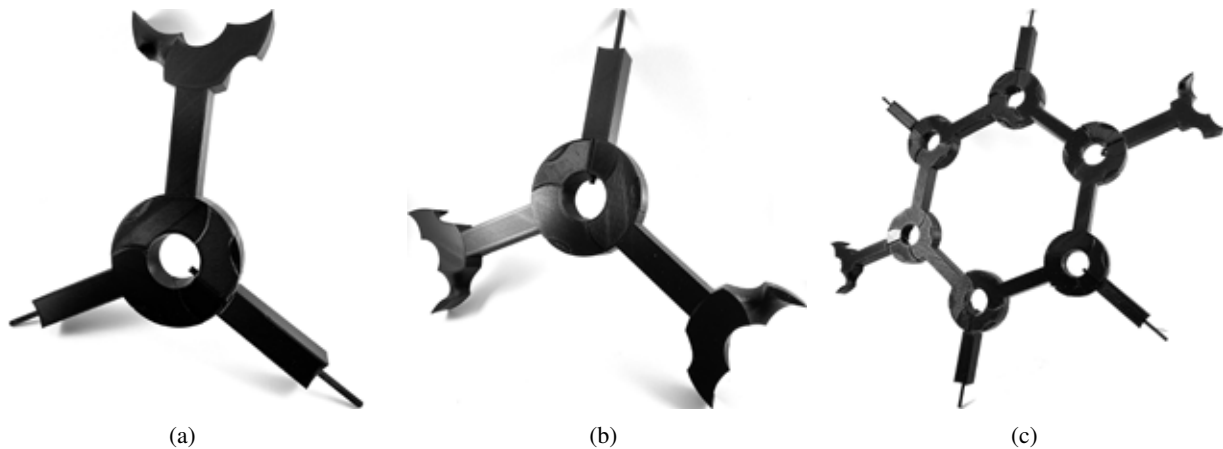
Assembly of 3D printed edge elements shown in Figure 3 to construct of 2D hexagonal frames: (a) Assembly of a three sided corner that use all types of Edge Elements, (b) Assembly of a three sided corner that use two basic Edge Element and one Edge Element with two keys, (c) Assembly of one hexagon. This structure can indefinitely be extended to form a hexagonal grid
